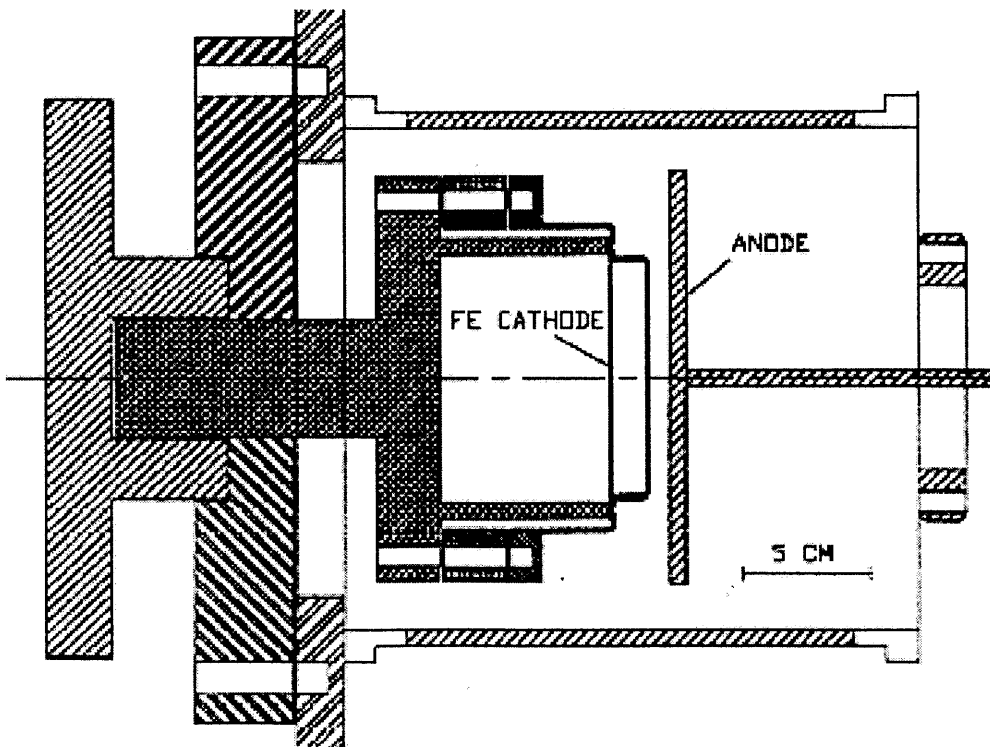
AutoCAD drawing of the mechanical setup used to test the annular ferroelectric gun at MIT.
